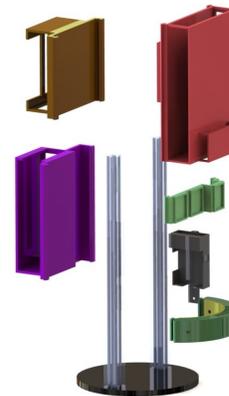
Exploded view of electronics stack. A customized network of mounts holds all of the electronics, including specific channels for clean wiring. The stack attaches to the fixed end cap for capsule removal independent of the stack.
